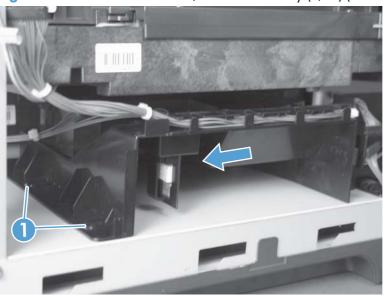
Remove the laser/scanner assembly (Y/M) (7 of 12)
